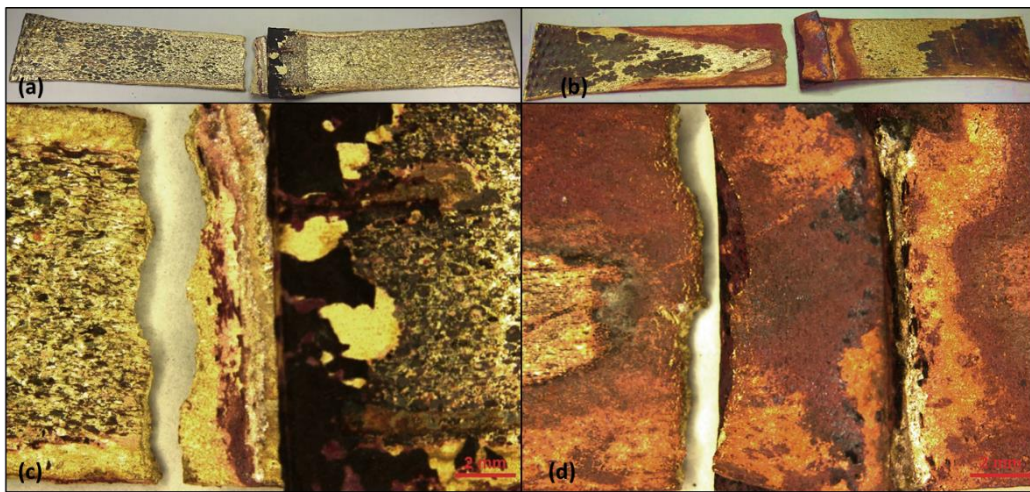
Macrographs of tensile fracture of brazing in conventional furnace at (a) and (c); in microwave furnace (b) and (d).
